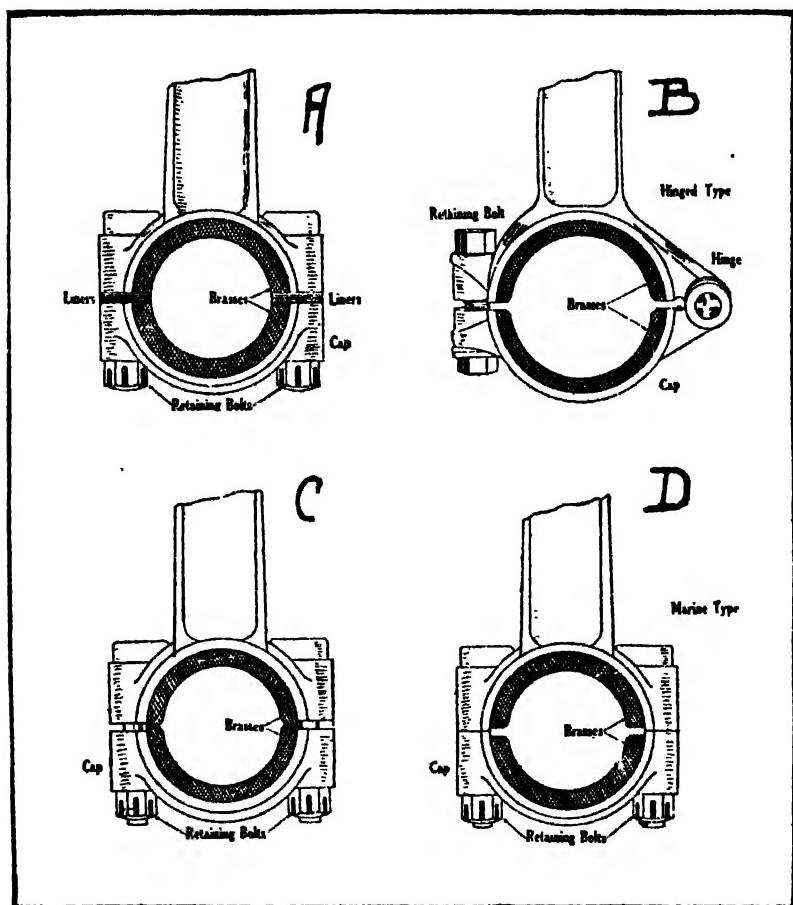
Outlining Common Types of Connecting Rod Big Ends.
